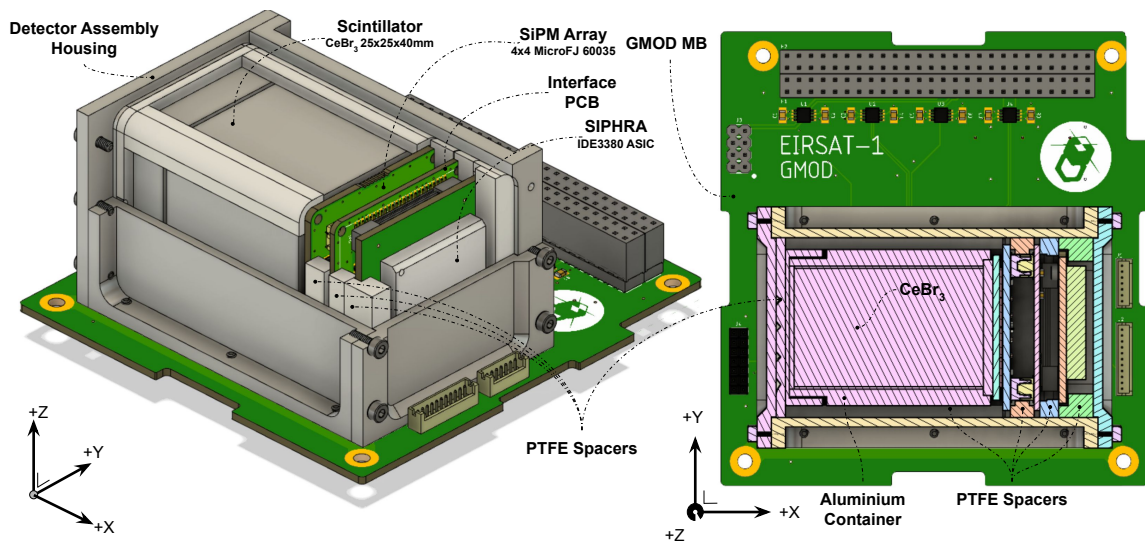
Left*) A pealed back view of GMOD’s internal electronics assembly, supported by PTFE spacers, showing the exposed CeBr_3 scintillator, SiPM array PCB, interface PCB and ASIC chip on board (CoB). *Right*) A top-down, +Z-axis view, with detector assembly cutaway showing internal assembly components. As described in Section 2.1.4, this figure shows the original mounting configuration used during the EQM subsystem and system level ETC (i.e. direct mounting to the motherboard). This configuration was later changed to as seen in Figure 2.6.
